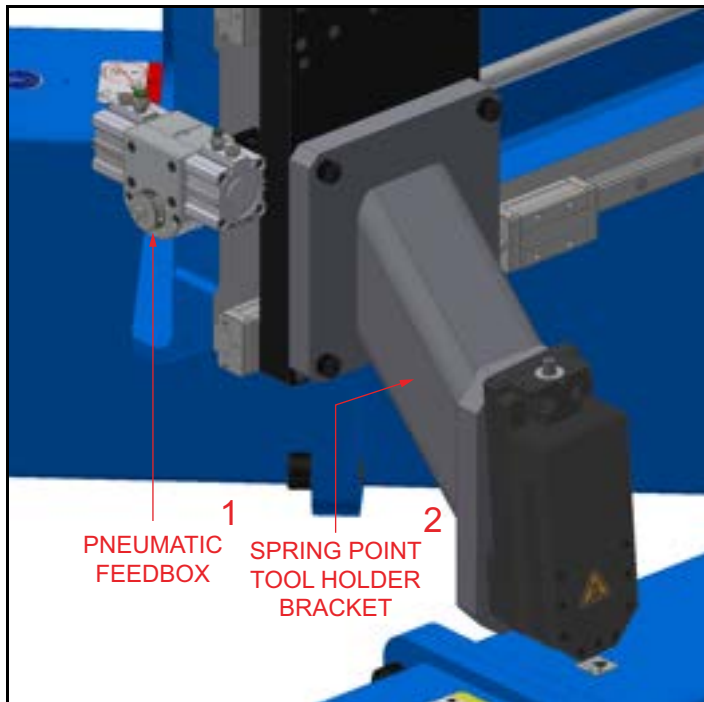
PNEUMATIC FEED BOX LOCATION
